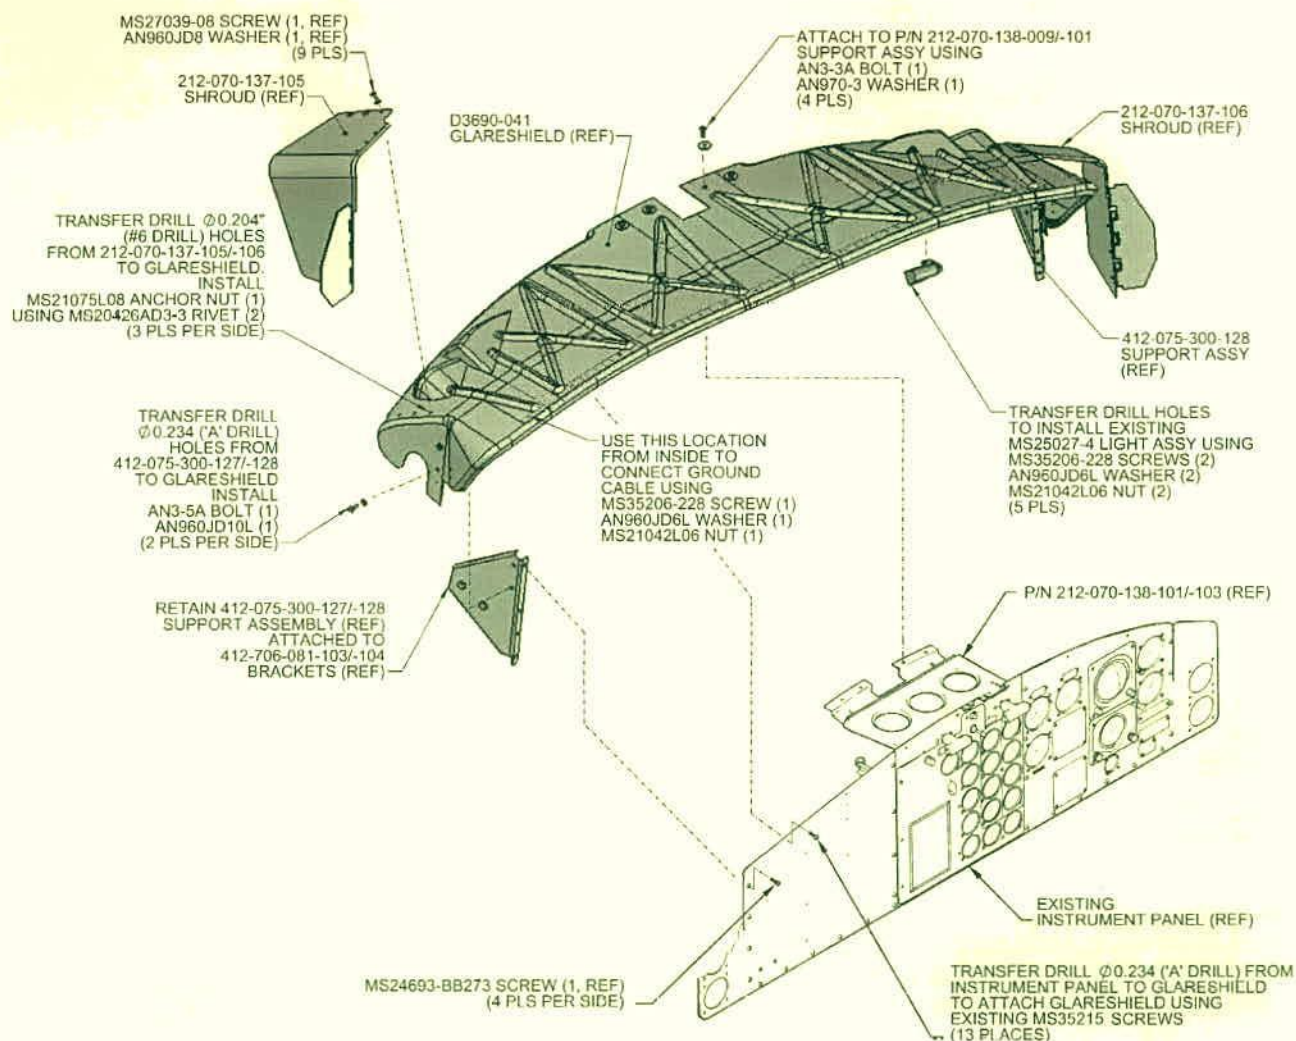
D412-776-011 Replacement Glareshield Kit Installation
